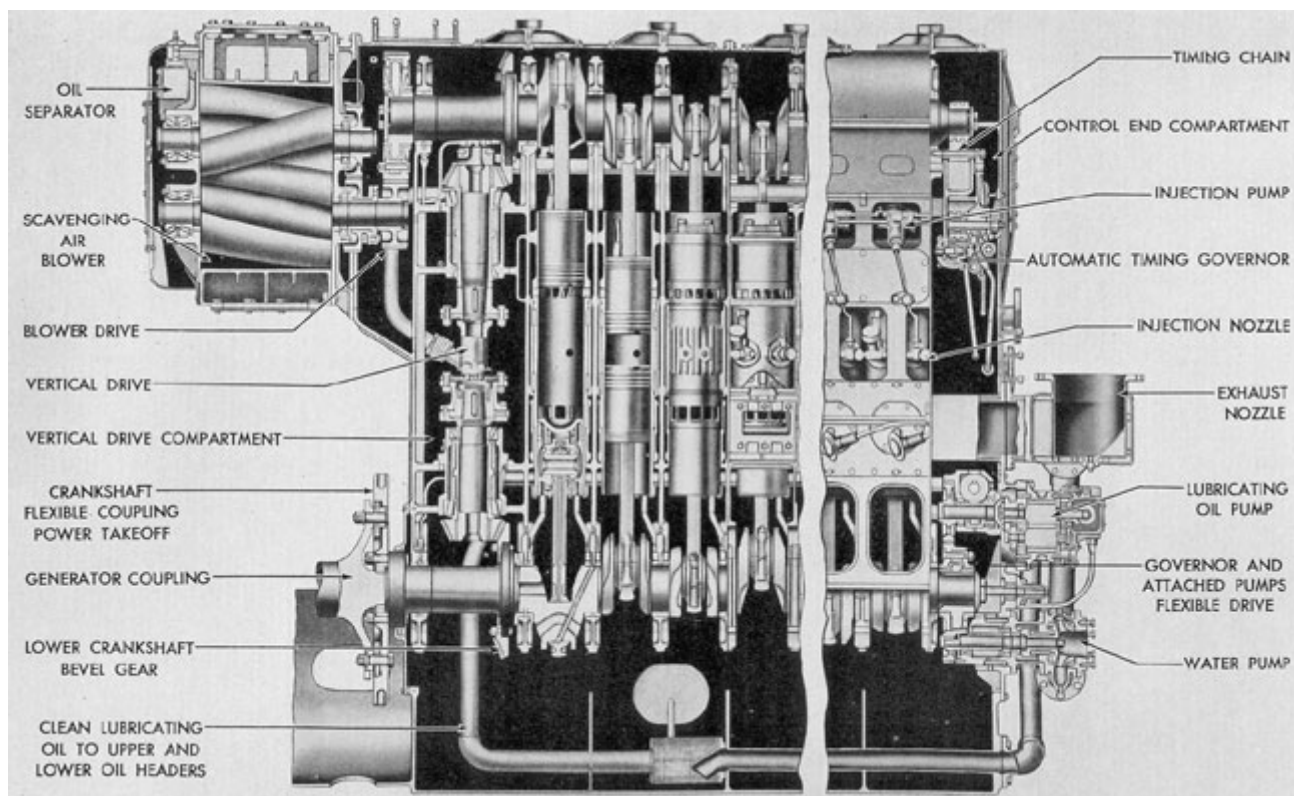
Longitudinal cross section of 7-cylinder F-M auxiliary engine.
